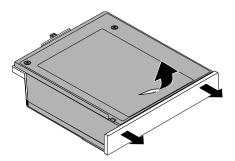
Removing the hard disk drive adapter from the adapter bracket
